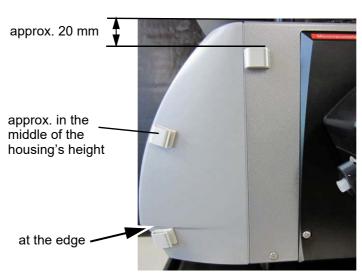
9 Mounting the cable clips onto Module Housing Lovis ME
